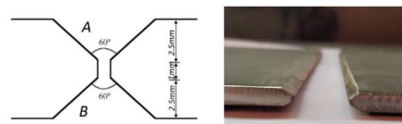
Sample 2 preparation with X-shaped groove for butt welded joint.
